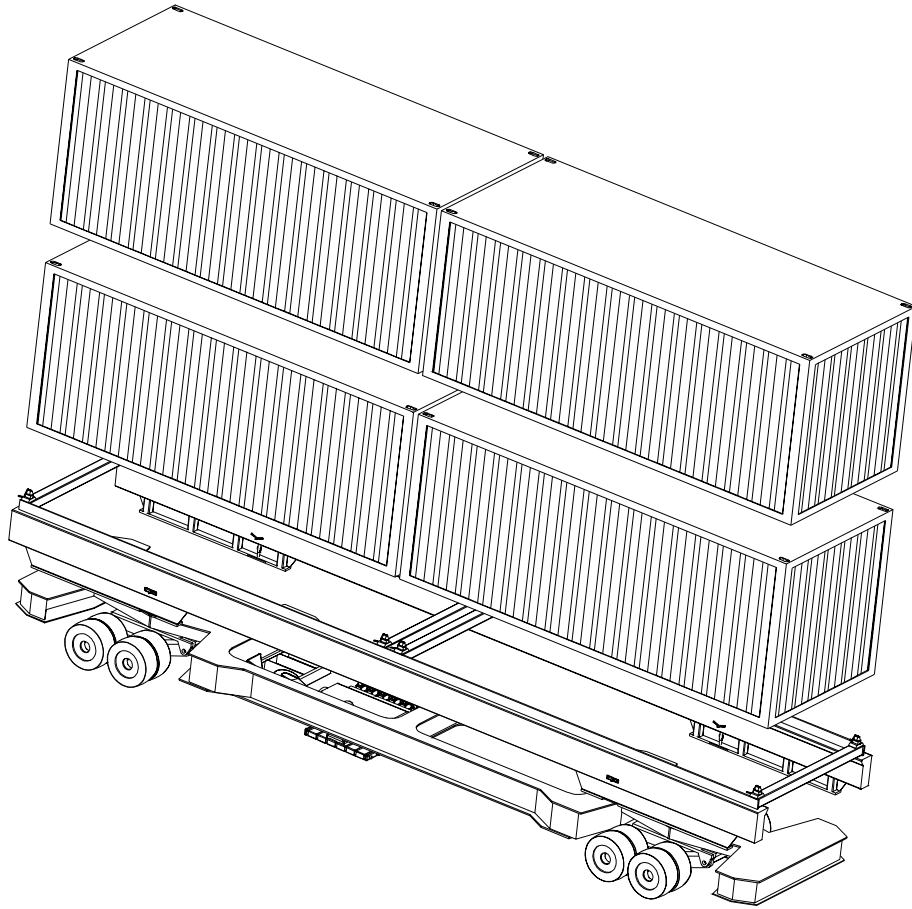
Exploded view of AGV under a cassette holding 4 TEU
